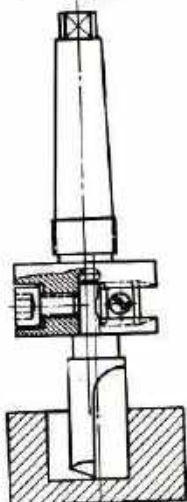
DETAIL OF THE CUTTER CHUCK AND BALANCING WEIGHTS
